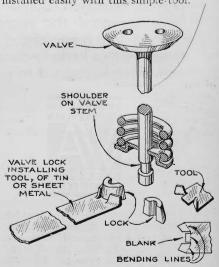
A valve lock installing tool that is easy to make and will save much wear and tear.
